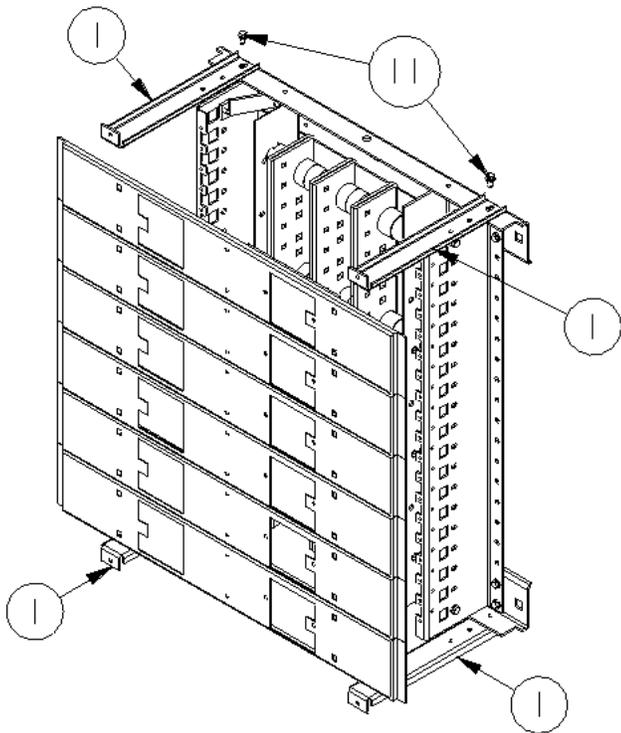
Dead front mounting posts mounted at the four corners of the interior.
